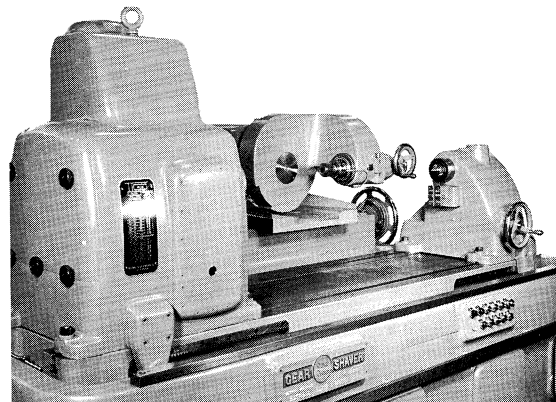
An internal cutter head used to shave internal gears on the Model GCJ-36 in. shaver.
